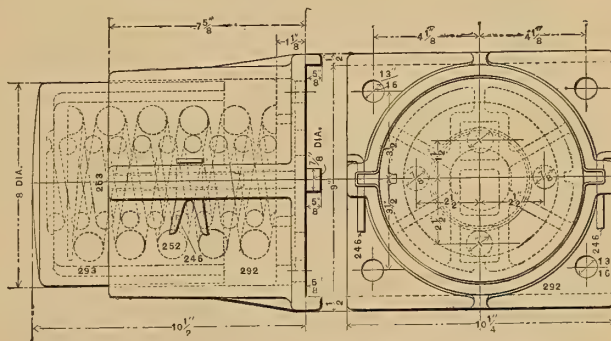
GOULD SPRING BUFFER FOR FREIGHT
